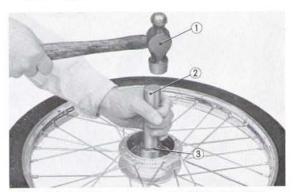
1 Ball peen hammer 3 6201 ball bearing
